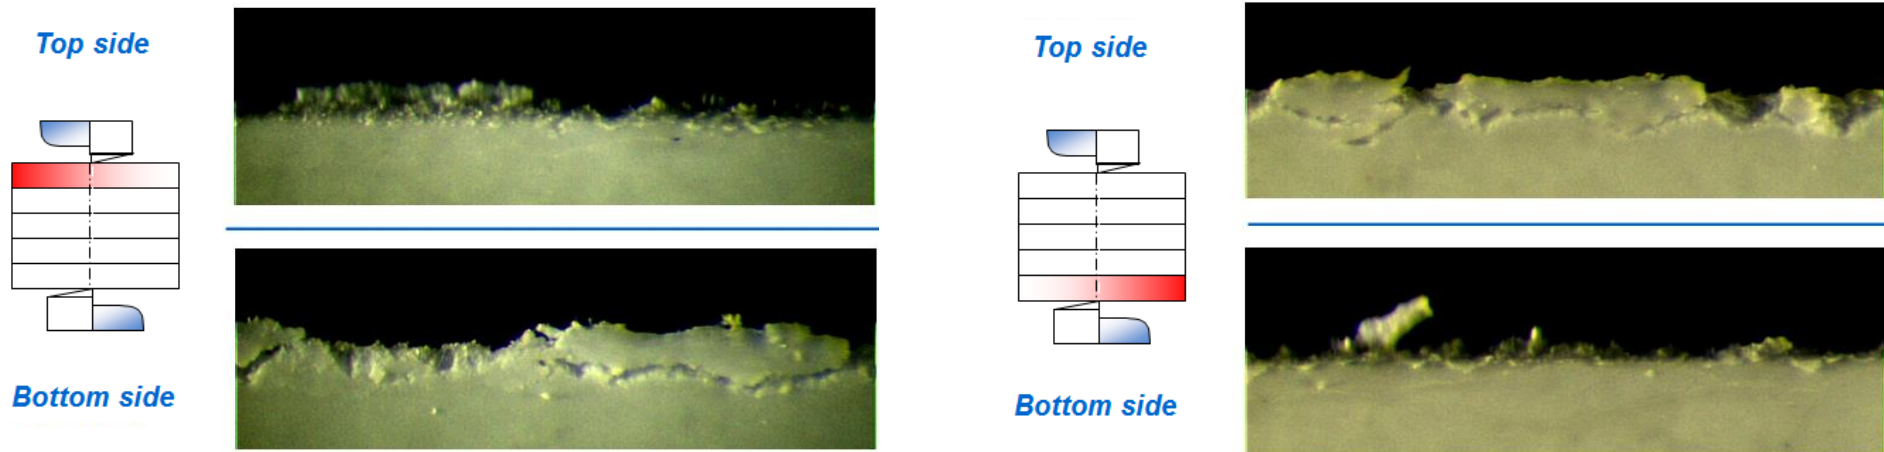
Burr observed at the cross cut when cutting 5 sheets - gloss paper 170 g/m² (left: first sheet leading edge / right: last sheet trailing edge)
